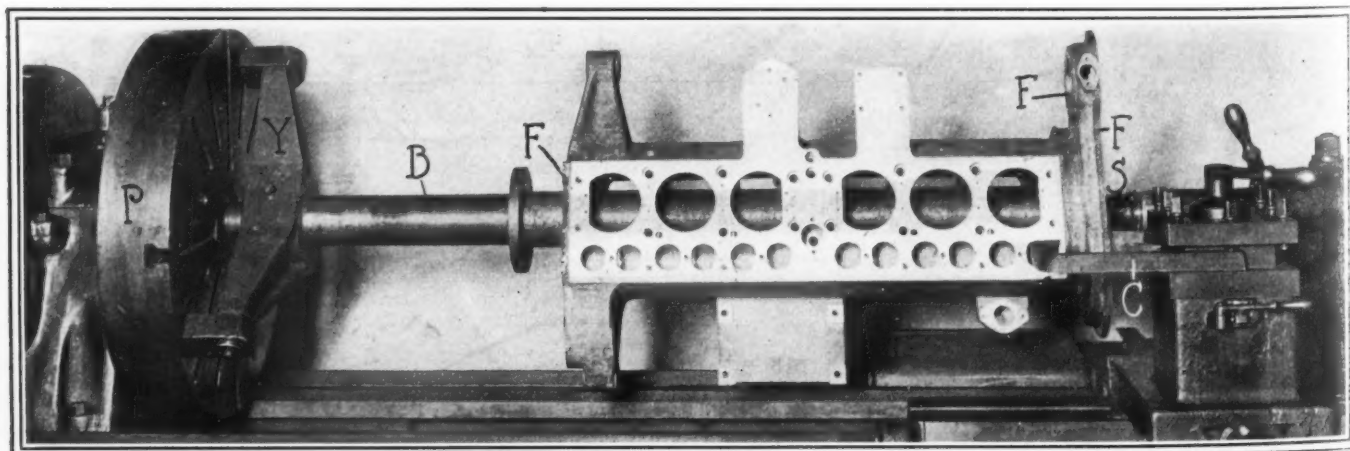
Marmon uses a lathe for facing off the ends of the crankcase by the cutter C
